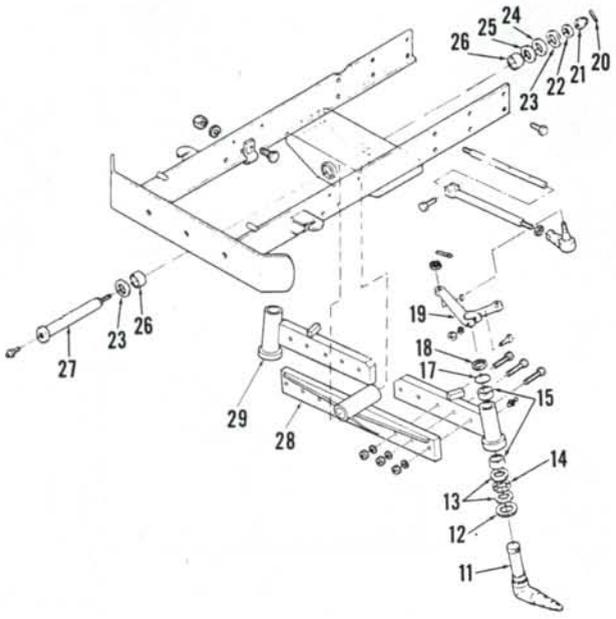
Exploded view of adjustable tread width front axle available on 1100, 1110, 1200 and 1210 models. Refer to Fig. 1 for legend except for the following:
